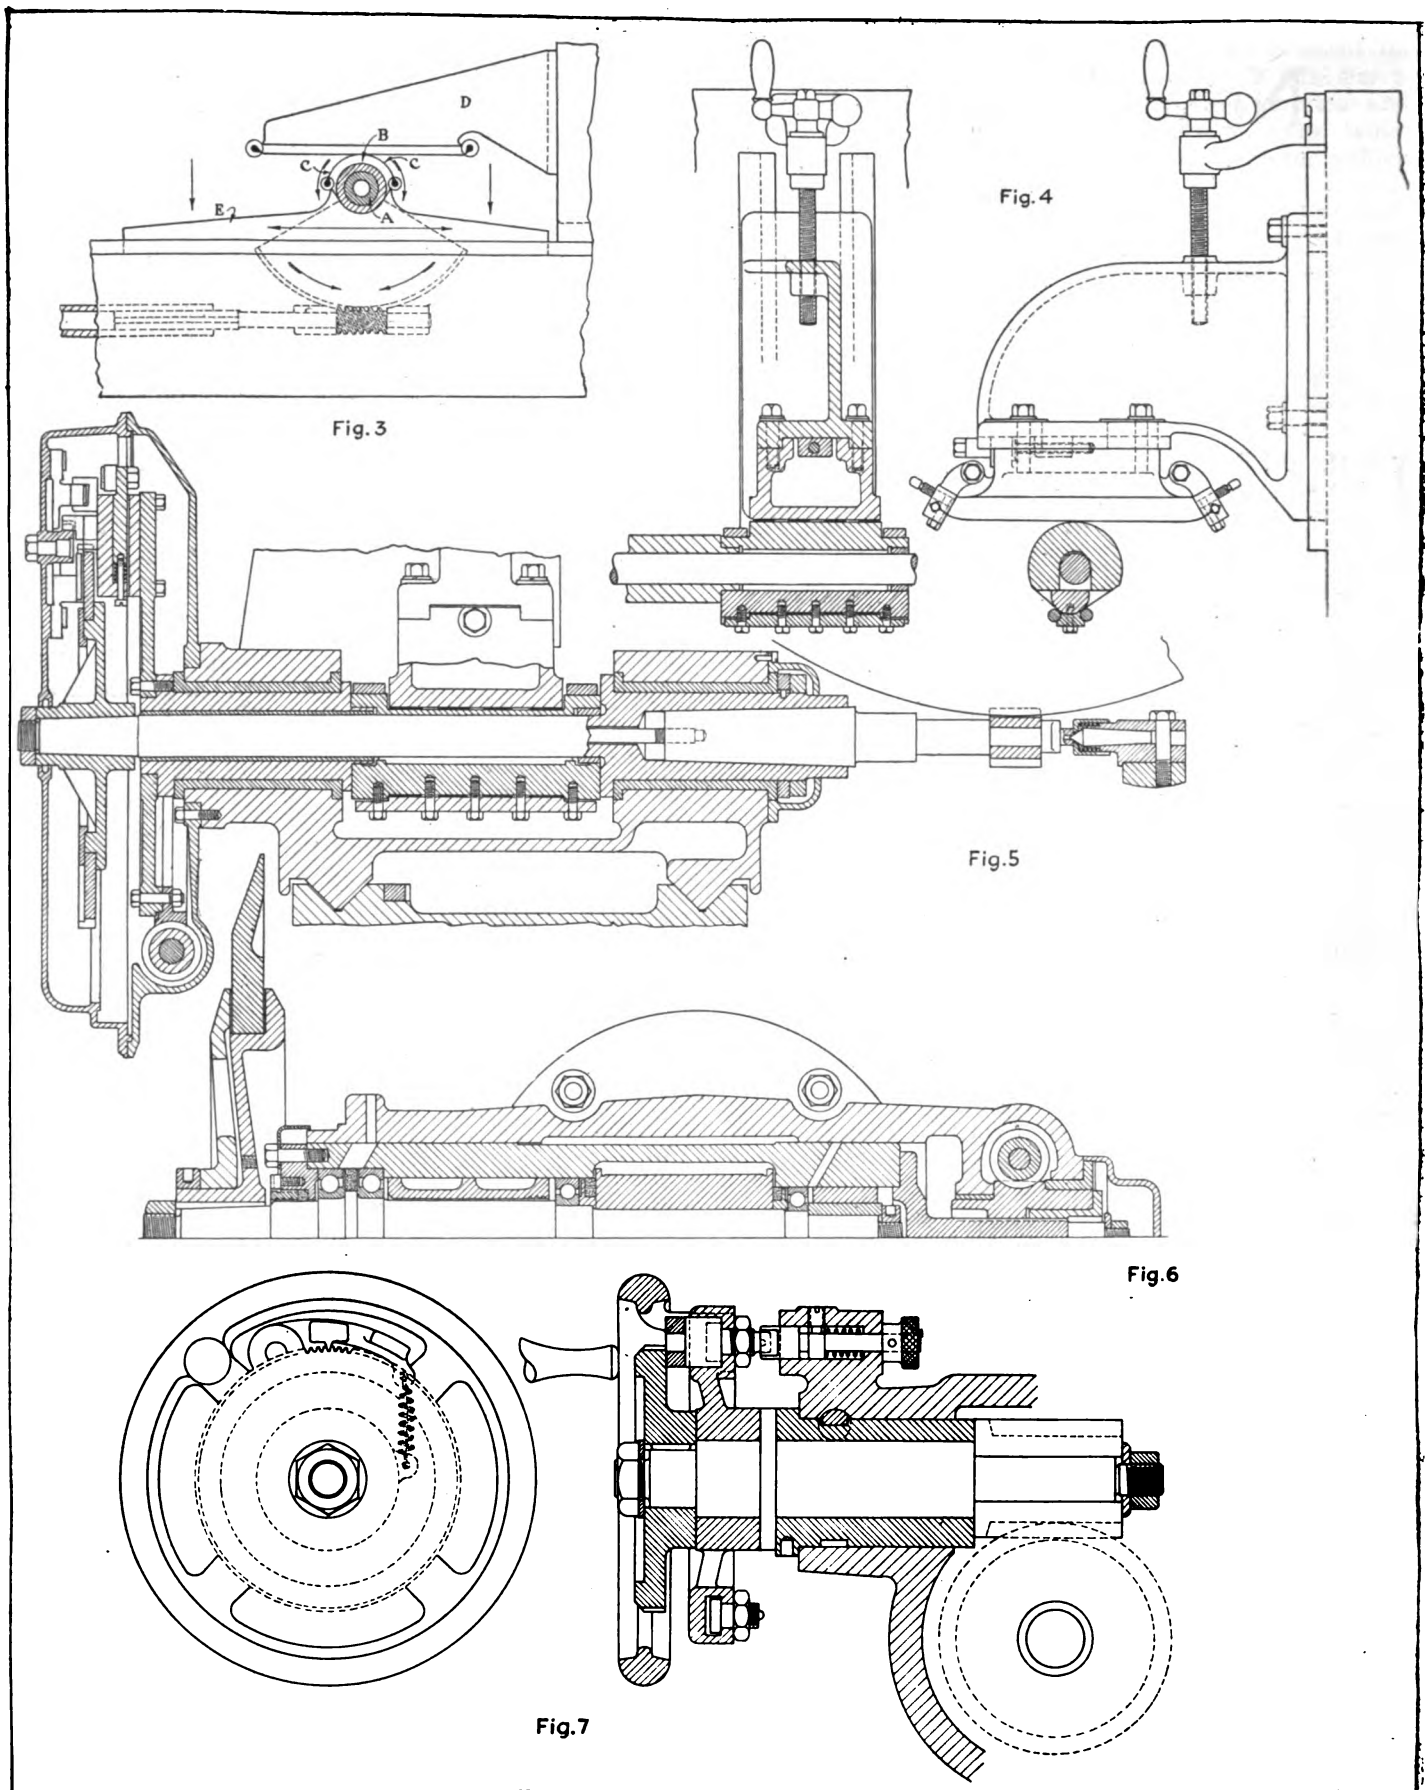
Diagram of the mechanism for producing the combined rotary and sliding motion for gear generation. Fig. 4—Method of mounting bracket adjustably on column and securing tapes to tape bar. Fig. 5—Section through work spindle showing method of driving work arbor, construction of talstock and work mounted on arbor (gear pinion). Fig. 6—Section through grinding wheel spindle. Note the driving pulley in the center, the method of mounting the wheel on left, and worm and wheel micrometer adjustment for grinding wheel at right. Fig. 7—Micrometer adjustment for grinding wheel, used in dressing wheel and for setting for rough and finish cut
